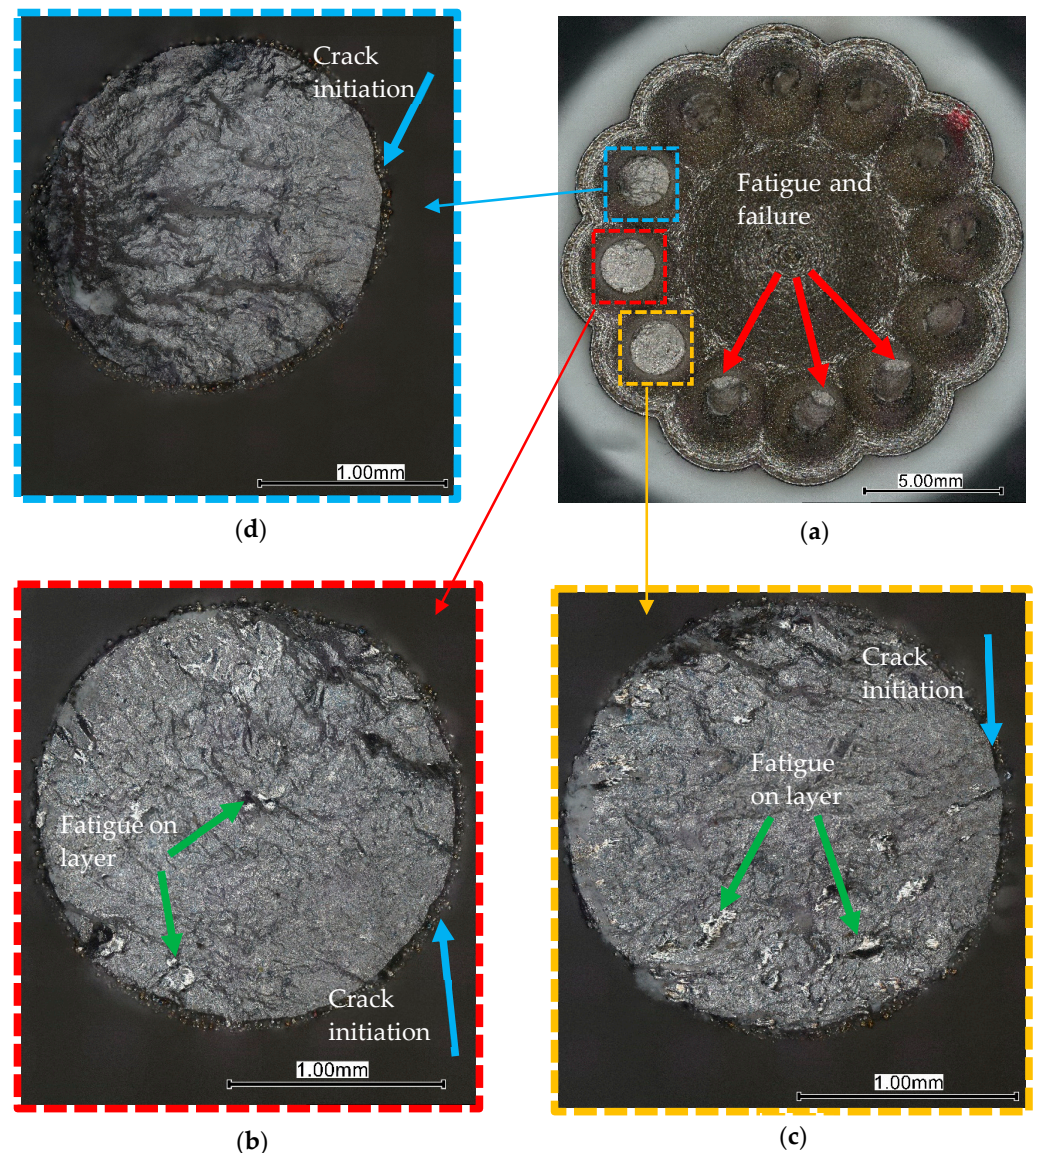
Fracture surface of the N12 geometry tested at a maximum stress level of 420 MPa: (a) fracture surface after the fatigue test, (b) the first rod fatigue fracture surface, (c) the second rod fatigue fracture surface, (d) the third rod fatigue fracture surface. The blue arrow in (a) shows the broken rod in (d), while the yellow arrow in (a) shows the detail in (c). The green arrows in (b,c) show fatigue at the place, where the blue arrow shows the initiation of a crack on the bar surface.
